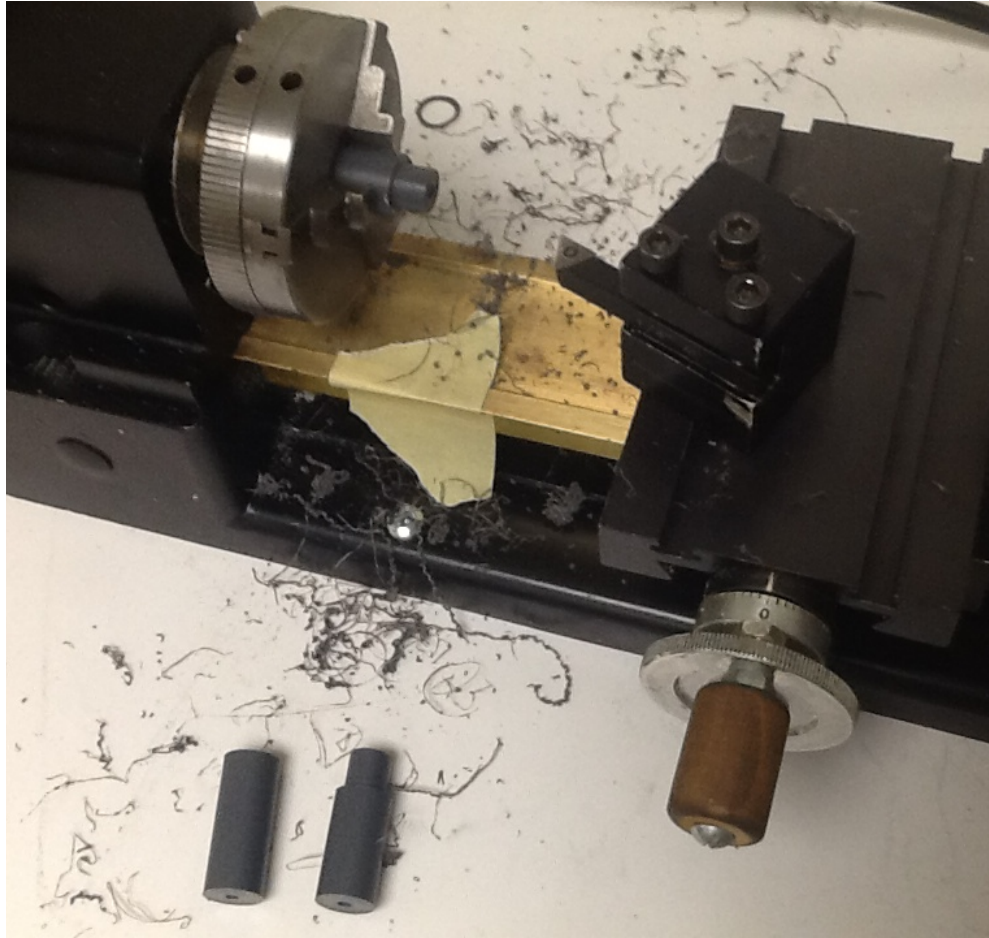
4: Fabrication of plug step 4. The male connection of the plug is made on the lathe. Finished and unfinished pieces are shown.
